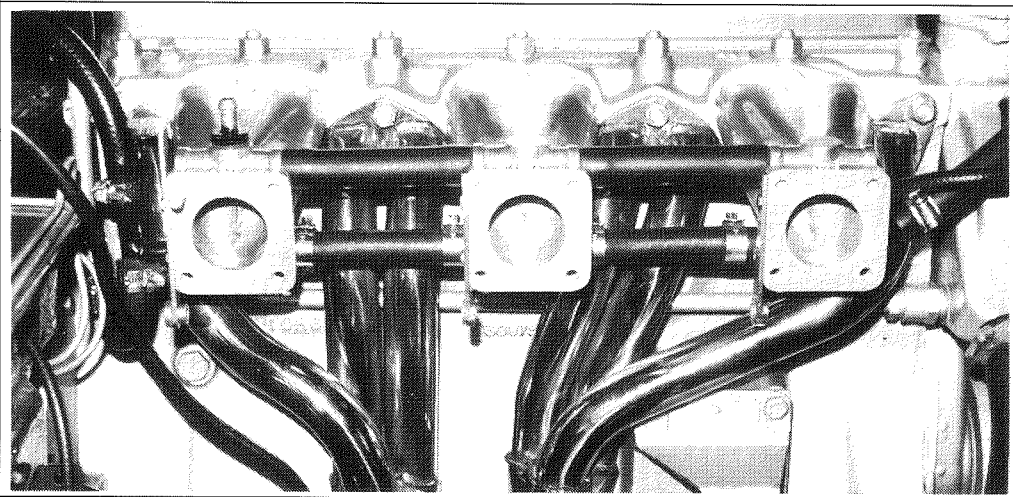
The manifolds with balance pipes and heater pipes fitted
